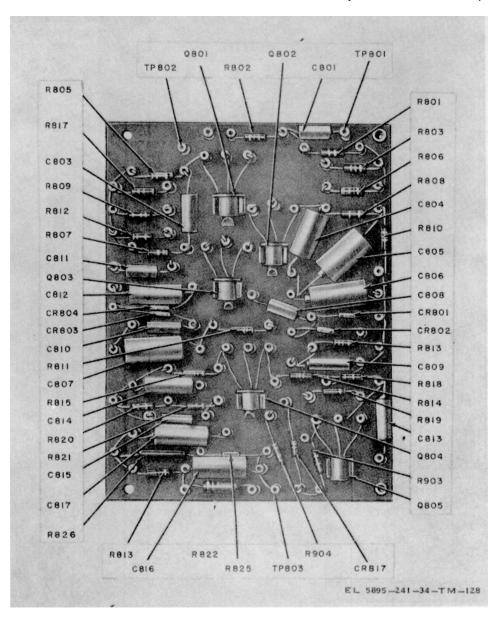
Amplifier Assembly AM-2827/FSW-8, terminal board TB801, parts location.
